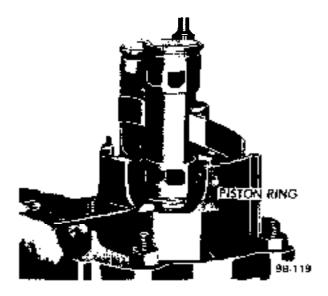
B-147 Compressing Front Piston Rings -Service Pistons
